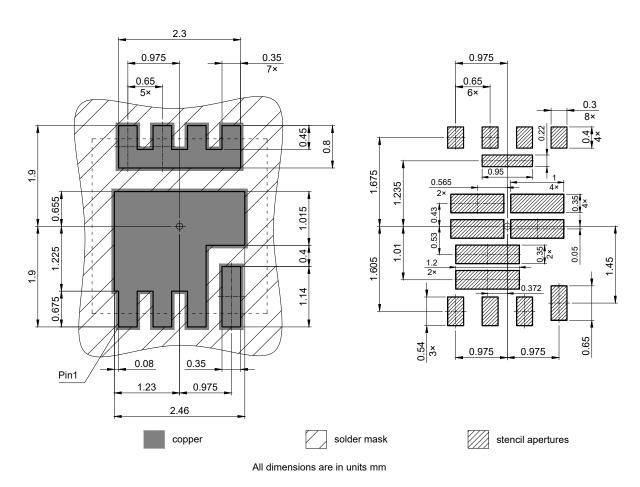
Outline Footprint (PG-WHSON-8-1), dimensions in mm
